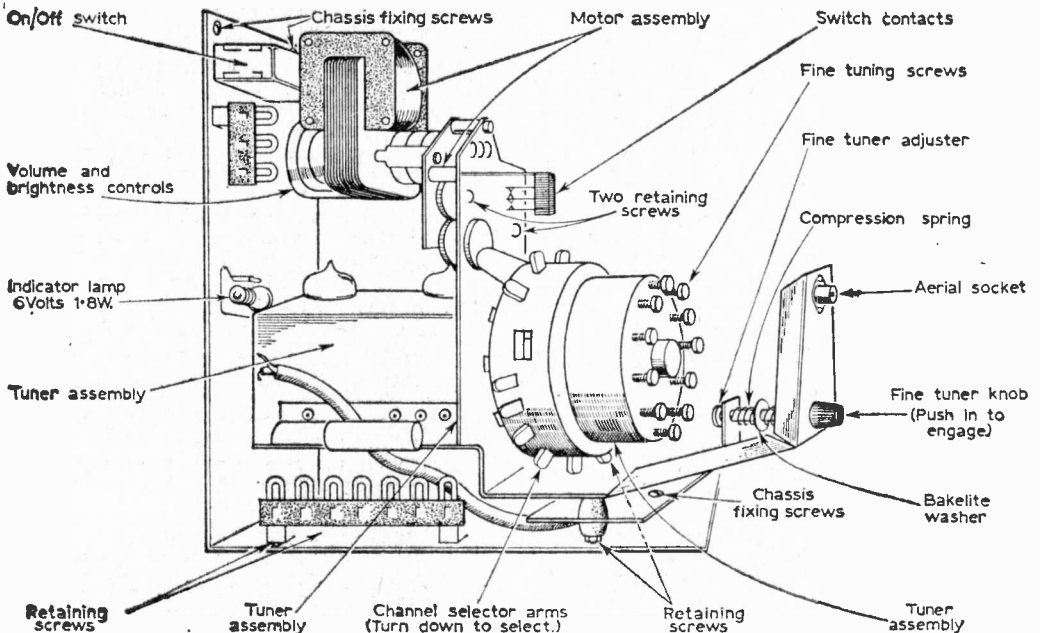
A detailed view of the motorised tuner assembly employed in some of the receivers dealt with in this article.
